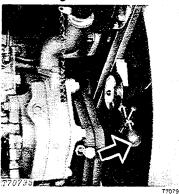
Strand Tension Gauge on Front Alternator Belt
